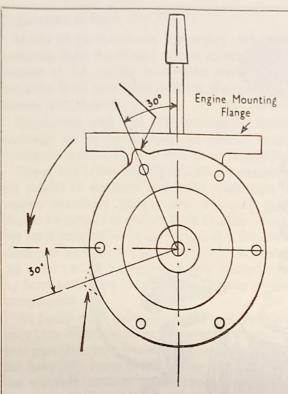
When first fitting the diaphragm assembly to the pump body the locating "tab" on the outside edge of the diaphragm should be as shown by arrow at the top of the diagram. After engaging the notches in the bottom of the pull rod, with the slot in the link, turn the diaphragm till the "tab" is where indicated by the arrow lower in the diagram and shown in dotted line.
